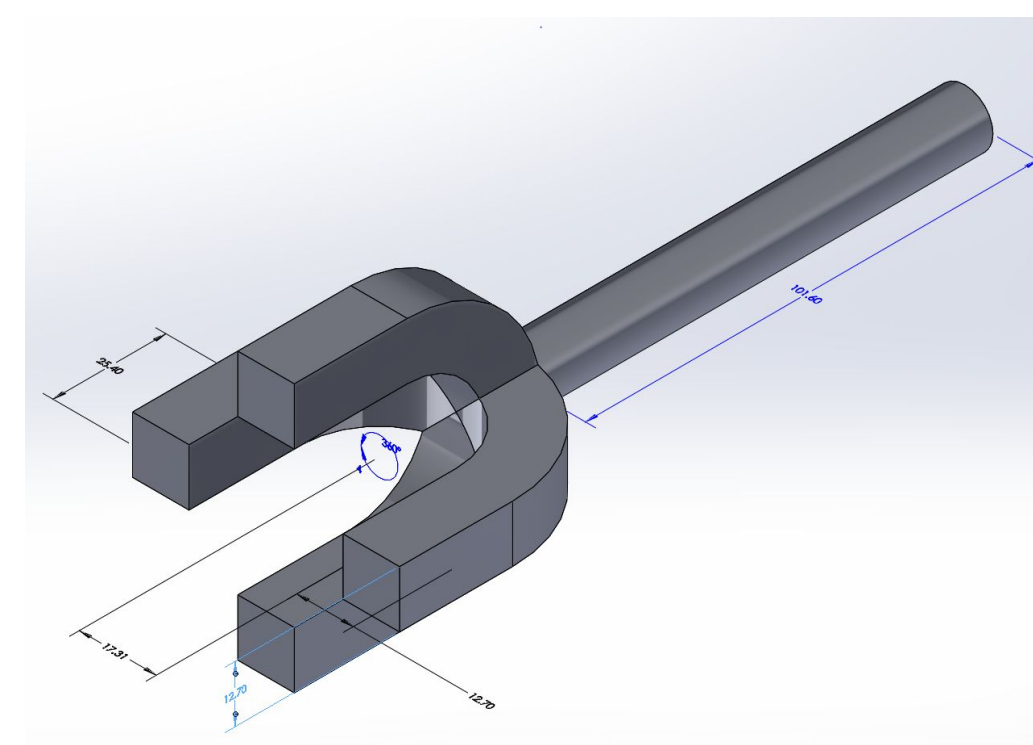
SOLIDWORKS DC Motor Attachment Drawing
